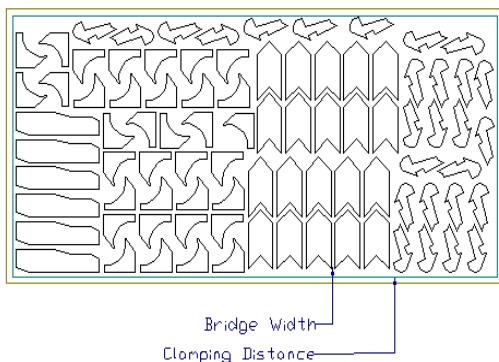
Cutting of Irregular Parts from a Rectangular Stock Sheet
